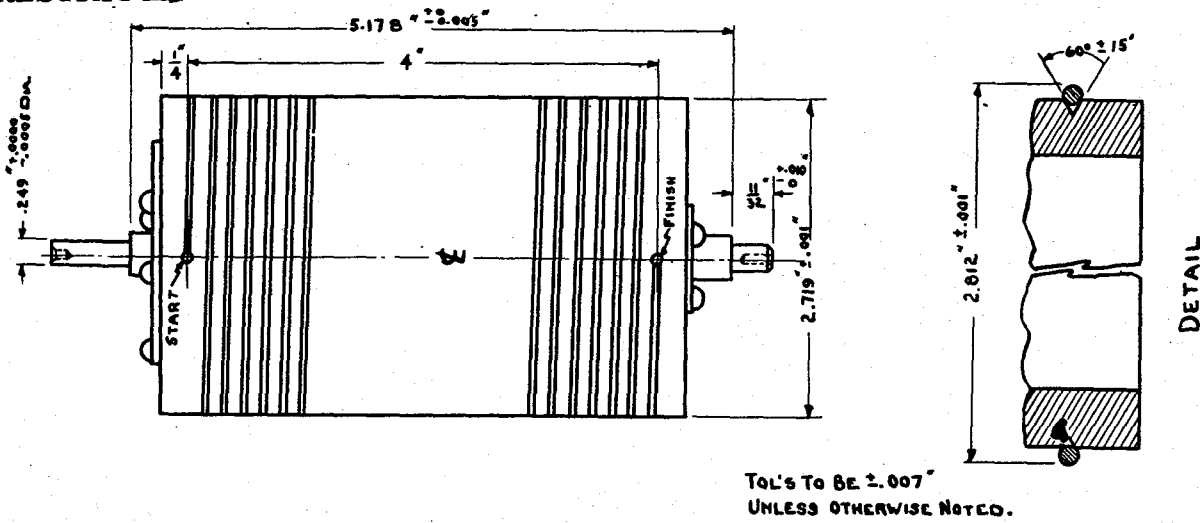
L18A & B, MASTER OSCILLATOR COILS
